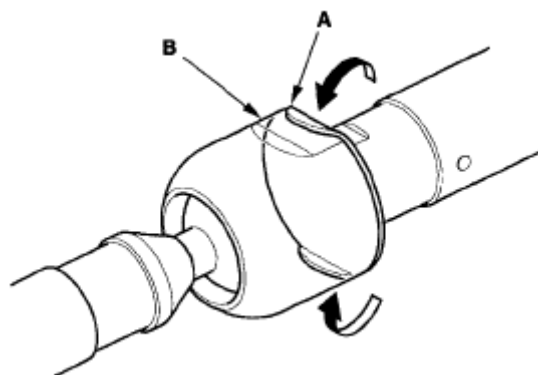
Identifying Lock Washer (A) Back Against Flat Spots (B) On Rack End Ball Joint Housing
